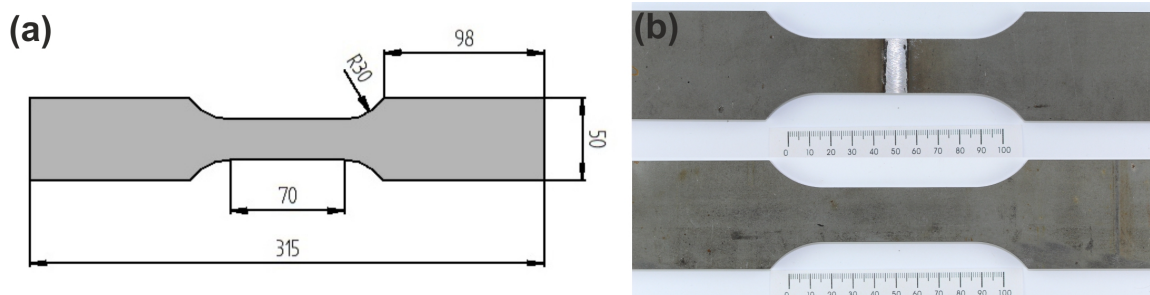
Geometry (in mm) (a) and image (b) of the tensile specimen
